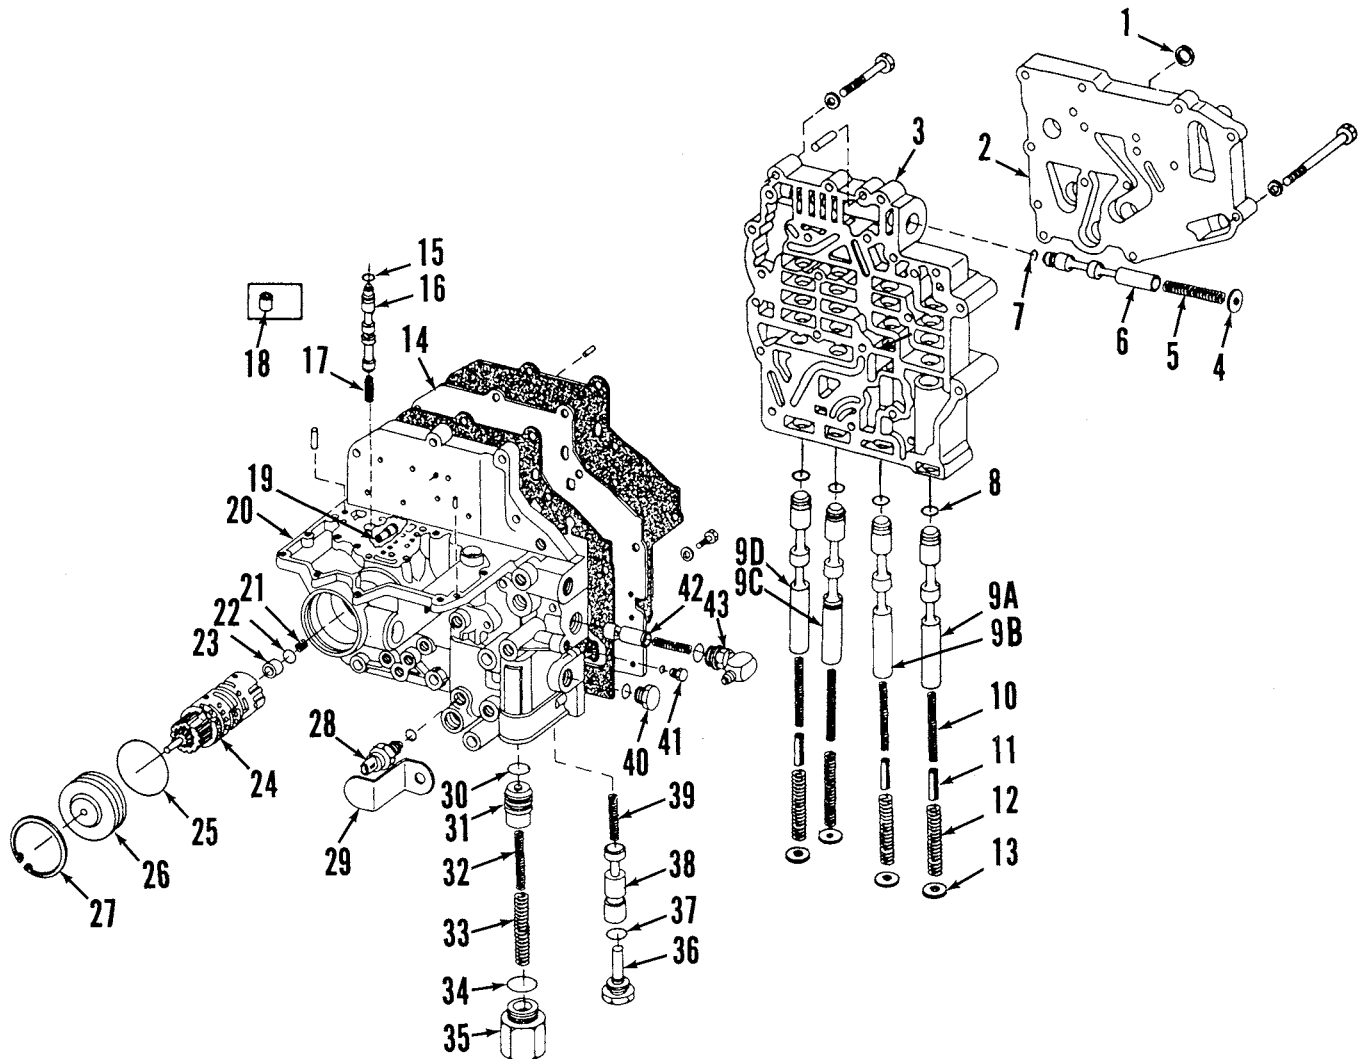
Exploded view of transmission control valve and shift valve assemblies used on Power Shift models. On early models, a sleeve (18) is used in place of spring (17) on engagement override valve (16), and inner (10) and outer (12) springs and pin (11) are used only in C3-B4 shift valve (9D) bore.
